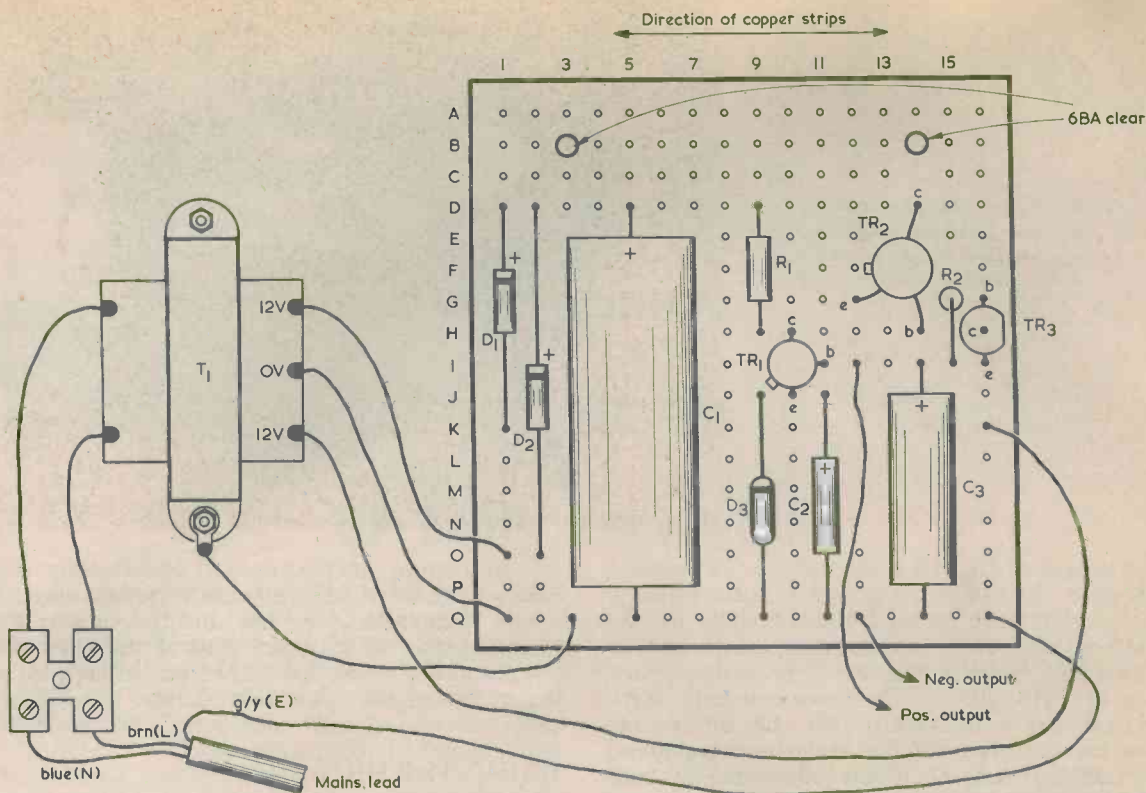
Wiring up the eliminator unit. All the small components are assembled on a Veroboard module
